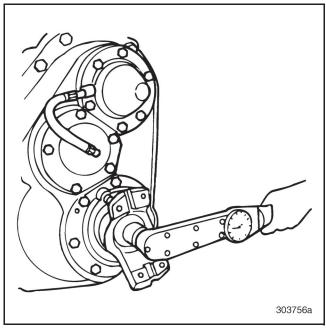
Installing Output Yoke Clamp Plate and Capscrew
